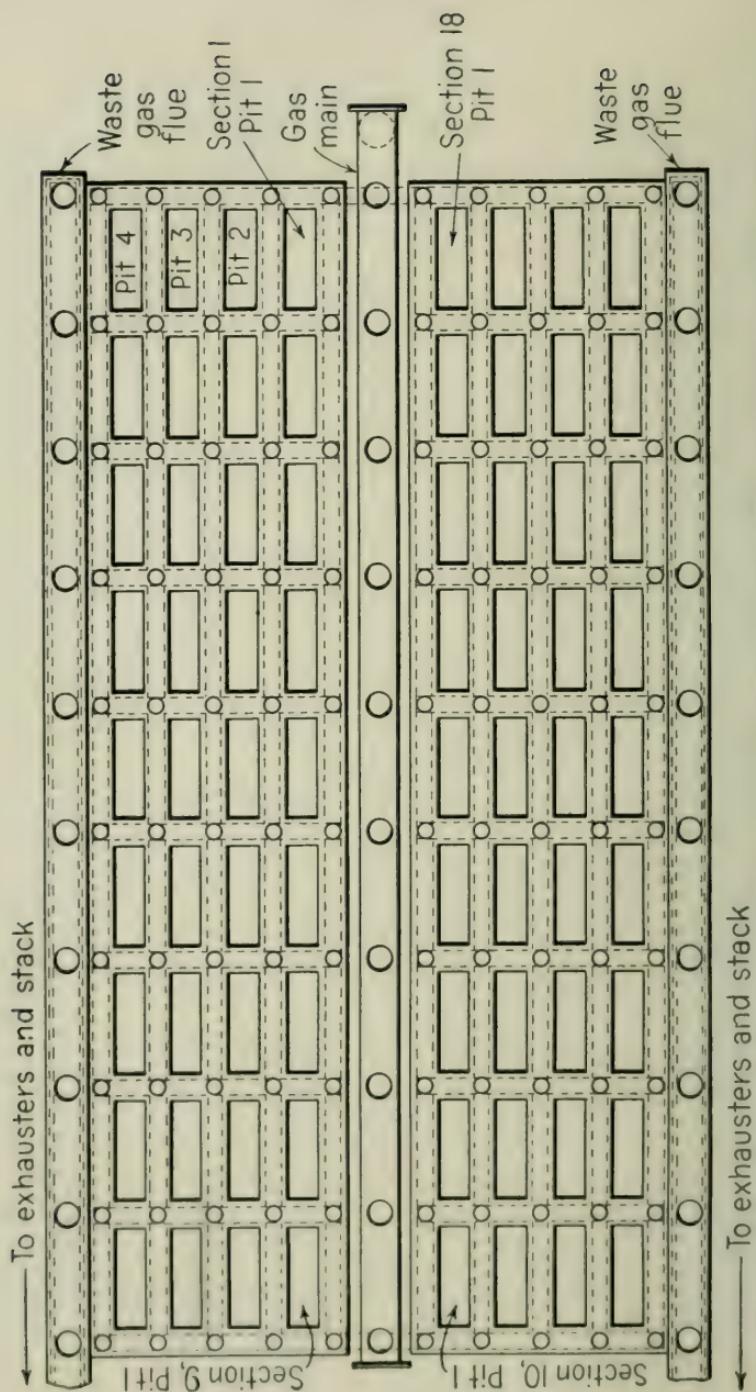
PLAN or 18 SECTION LONGITUDINAL PIT TYPE OF GAS FIRED ELECTRODE BAKING FURNACE
